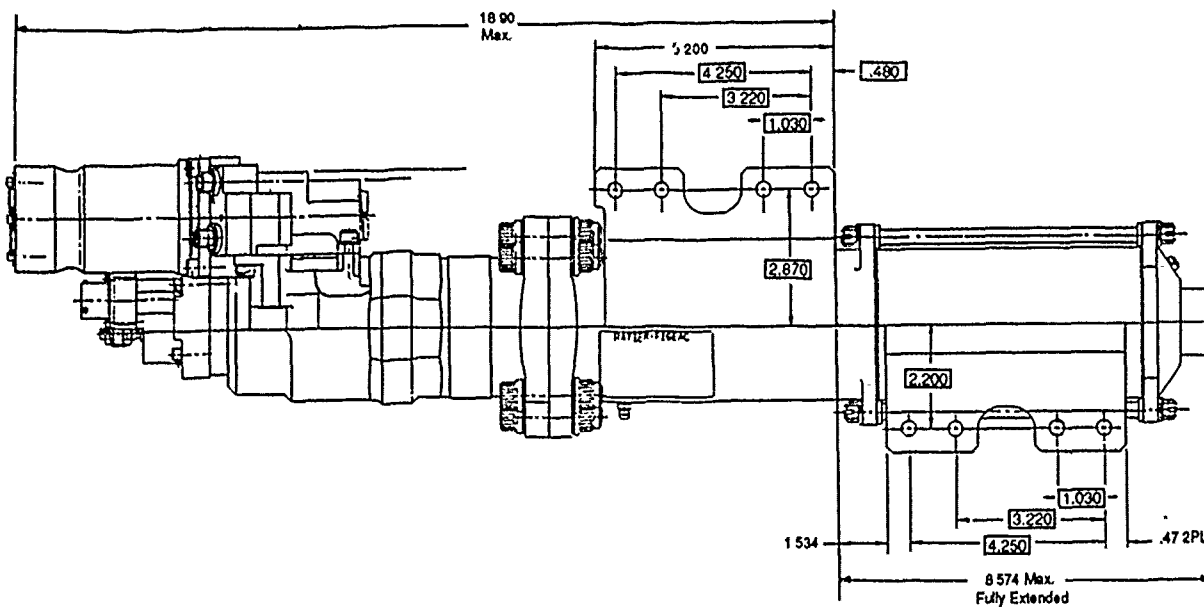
HR Textron - Recirculating Ball Screw Detail Drawing
